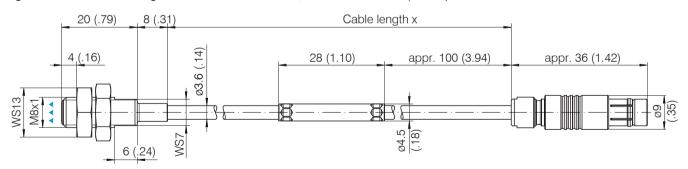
Dimensional drawing sensors ES-S1-C-CAx/mB0, dimensions in mm (inches)
